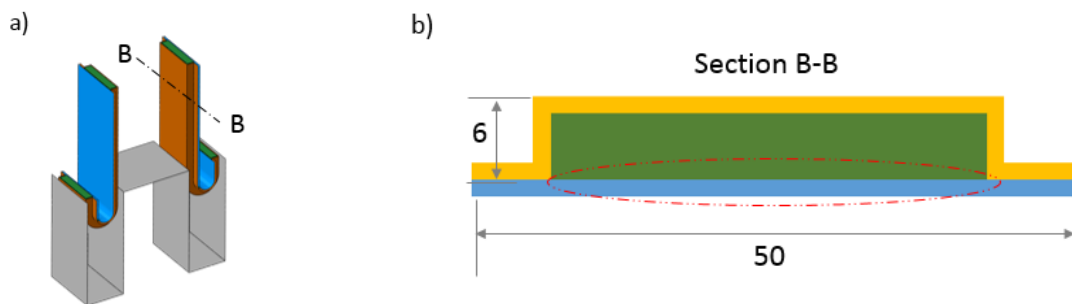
Geometric details of configuration-2 (all dimensions in mm)
